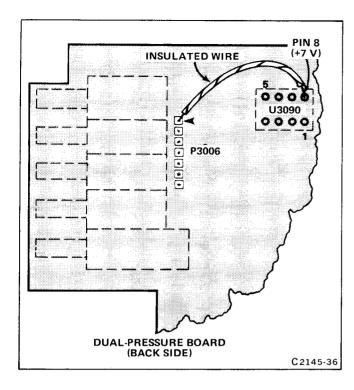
Adding wire to 414 Option 21 (MOD FA) Dual-Pressure Board.
